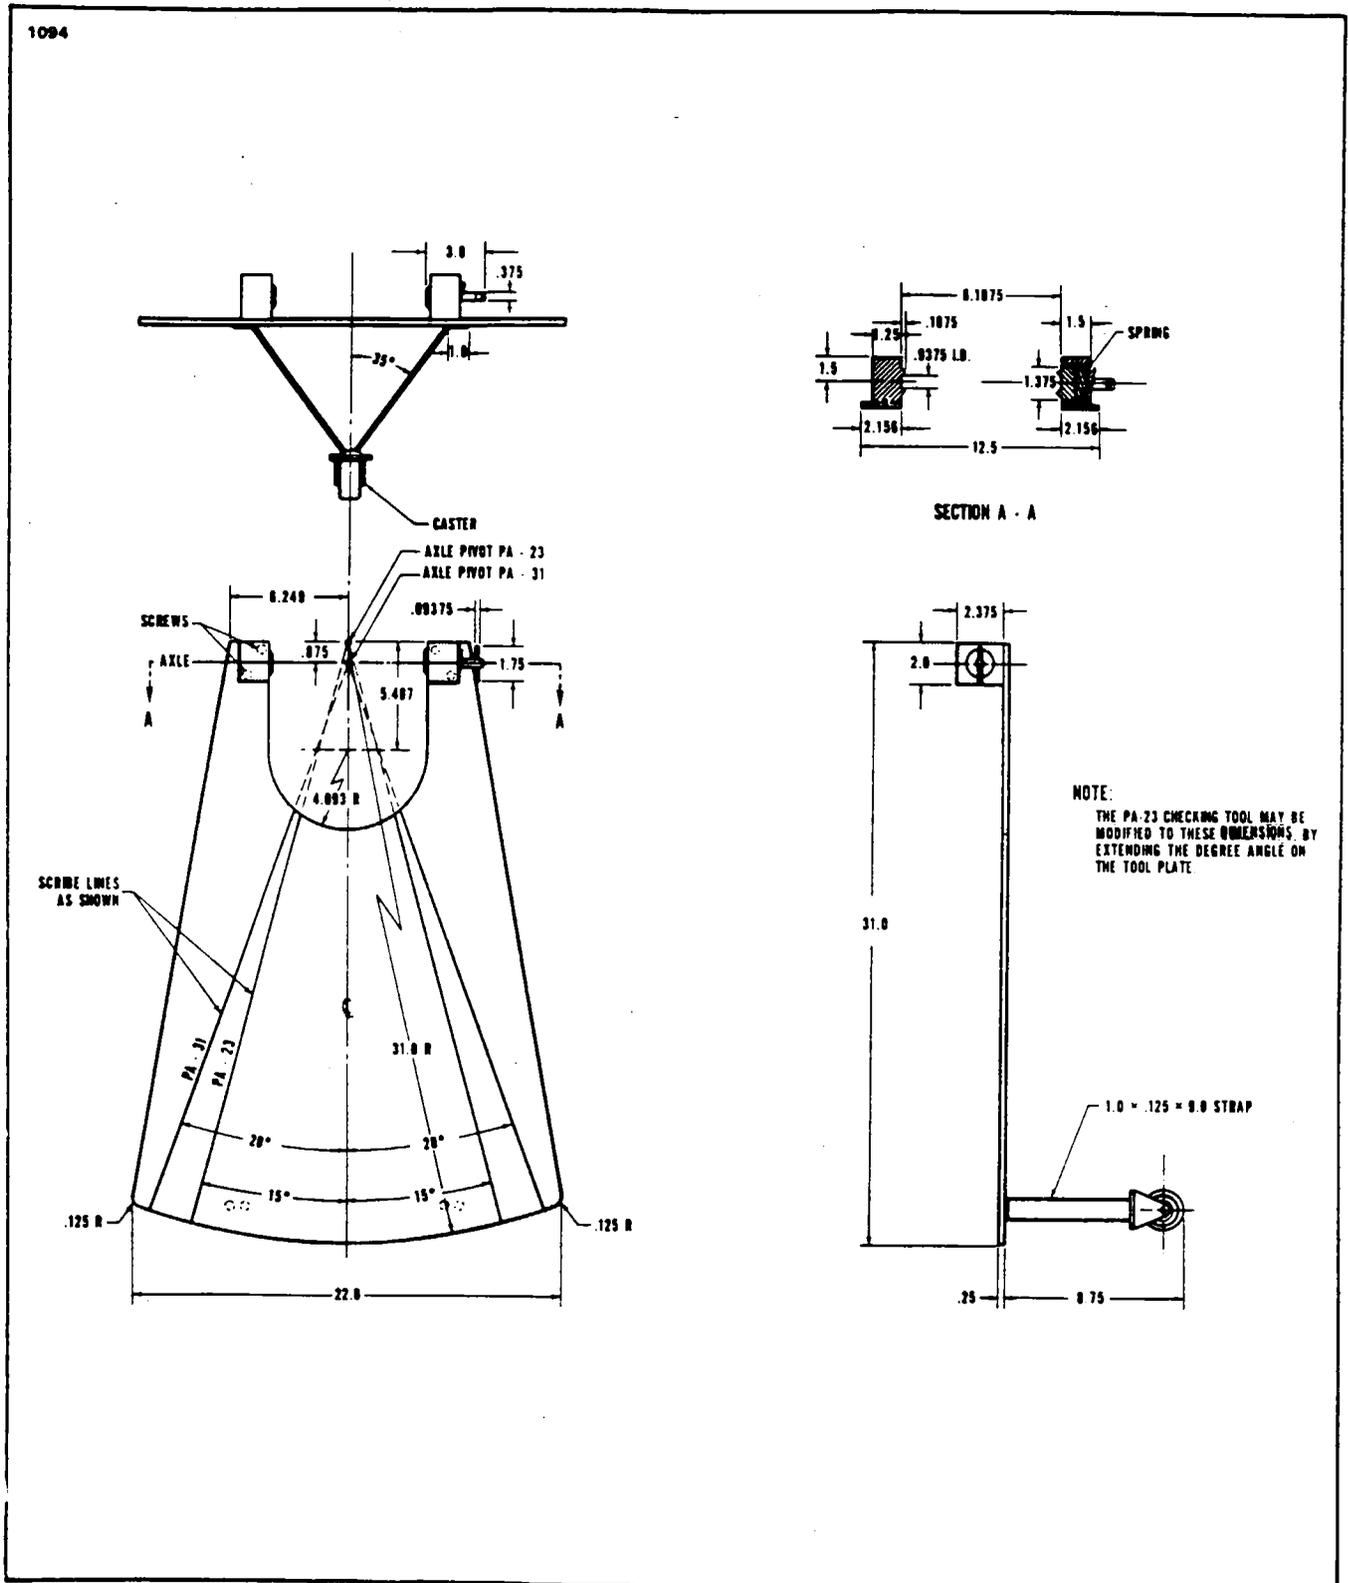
Fabricated Tool, Checking Nose Wheel Alignment
